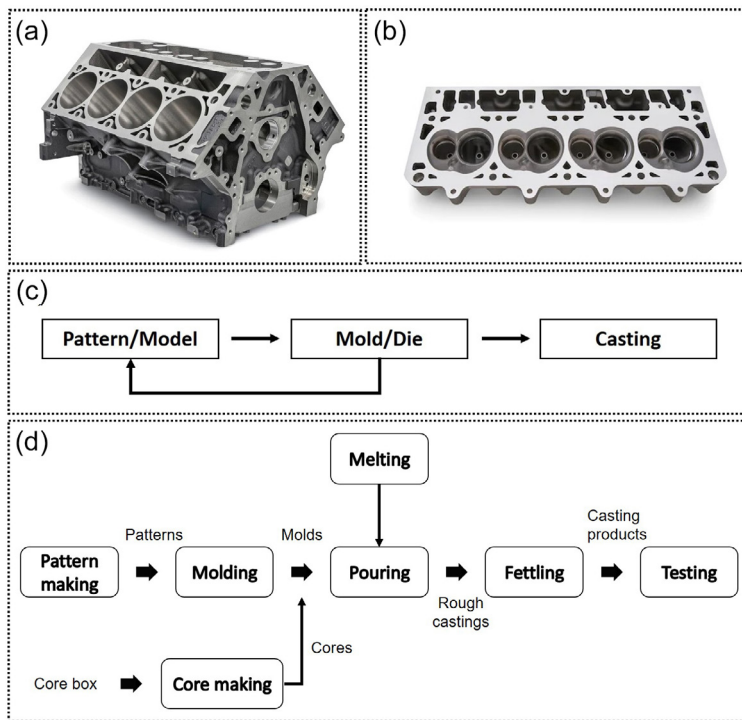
Cylinder block casting ^[7] (a), cylinder head casting ^[8] (b), the conversion of pattern to mold to casting (c), schematic diagram of the whole casting process (d)
